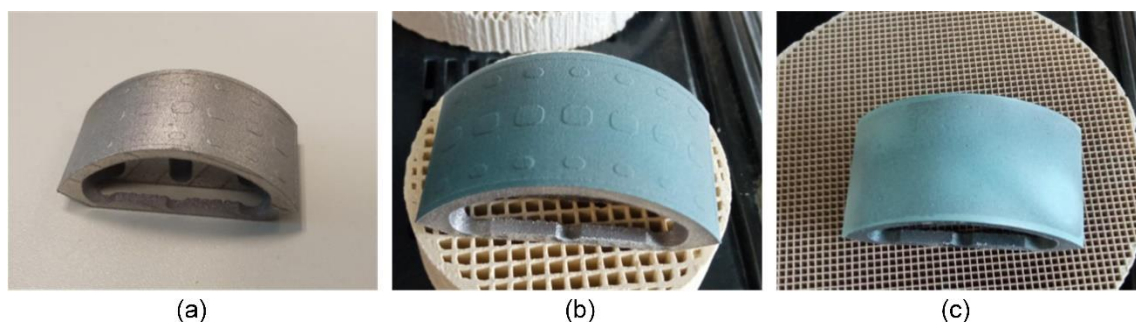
Consecutive steps to prime the TiNbTa component of the hybrid material-based functional demonstrator with a) untreated specimen, b) specimen coated with the glass solder, and c) completely primed specimen by stepwise firing and polishing of the glass solder to fill the gap between the designed spacers with the glass solder. For better visualization, the glass solder was dyed blue.
